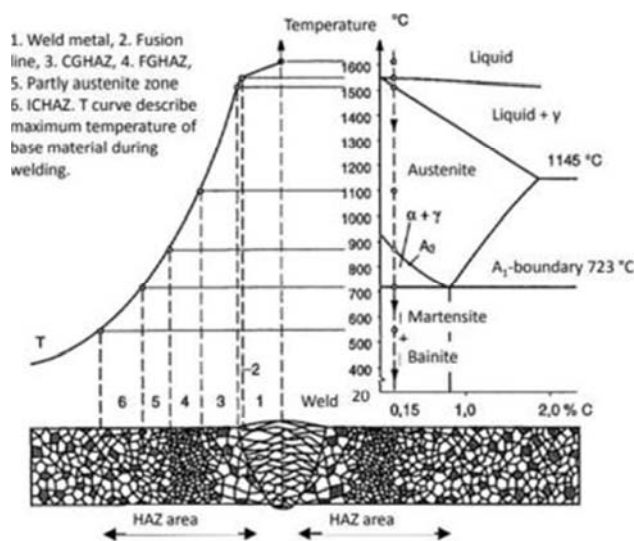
Maximum temperature of material during welding and HAZ microstructure after welding of steel [2]
